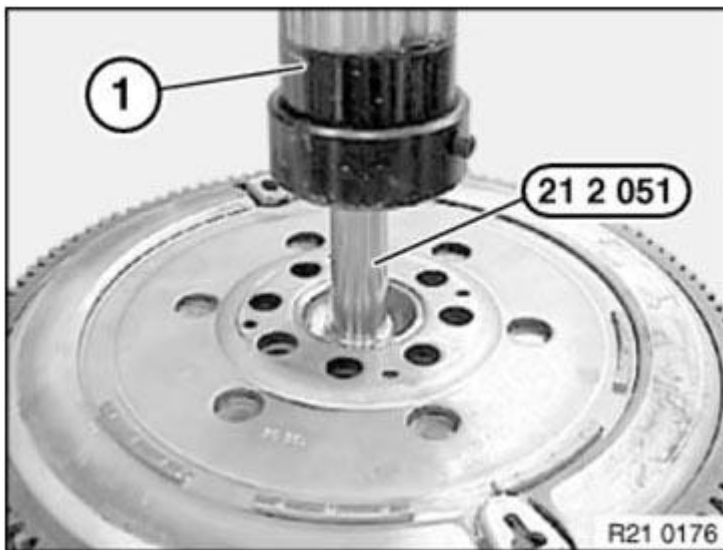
Pressing Roller Bearing Out Of Dual-Mass Flywheel Downwards On Engine Side
